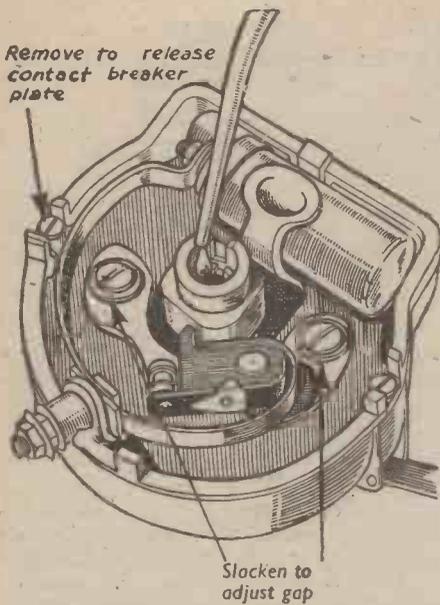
Details of a typical contact breaker, showing the points to which attention should be directed.
